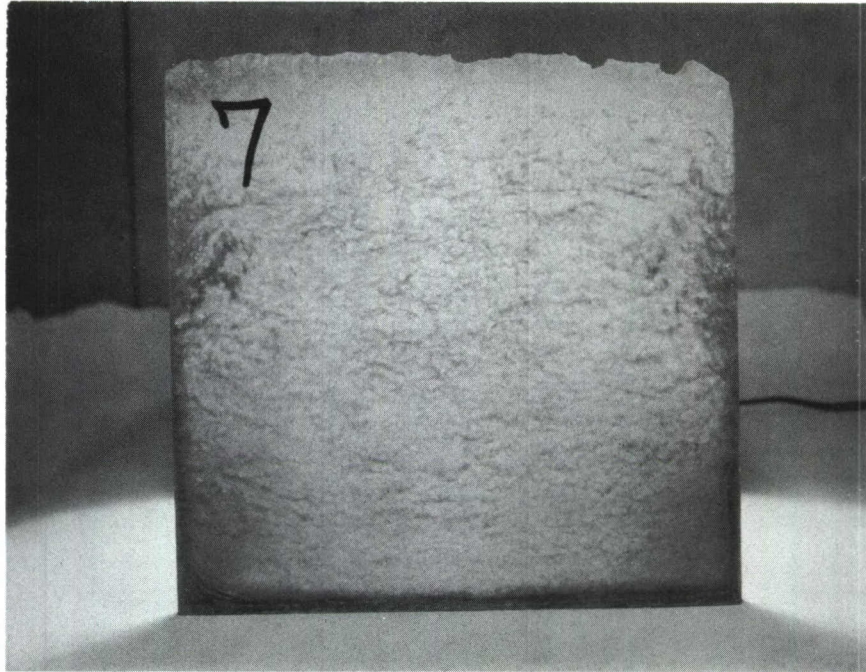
A Tapered Plate Molded From a 6" x 12" Preformed Biscuit Placed In The Thicker End Of The Mold Cavity
